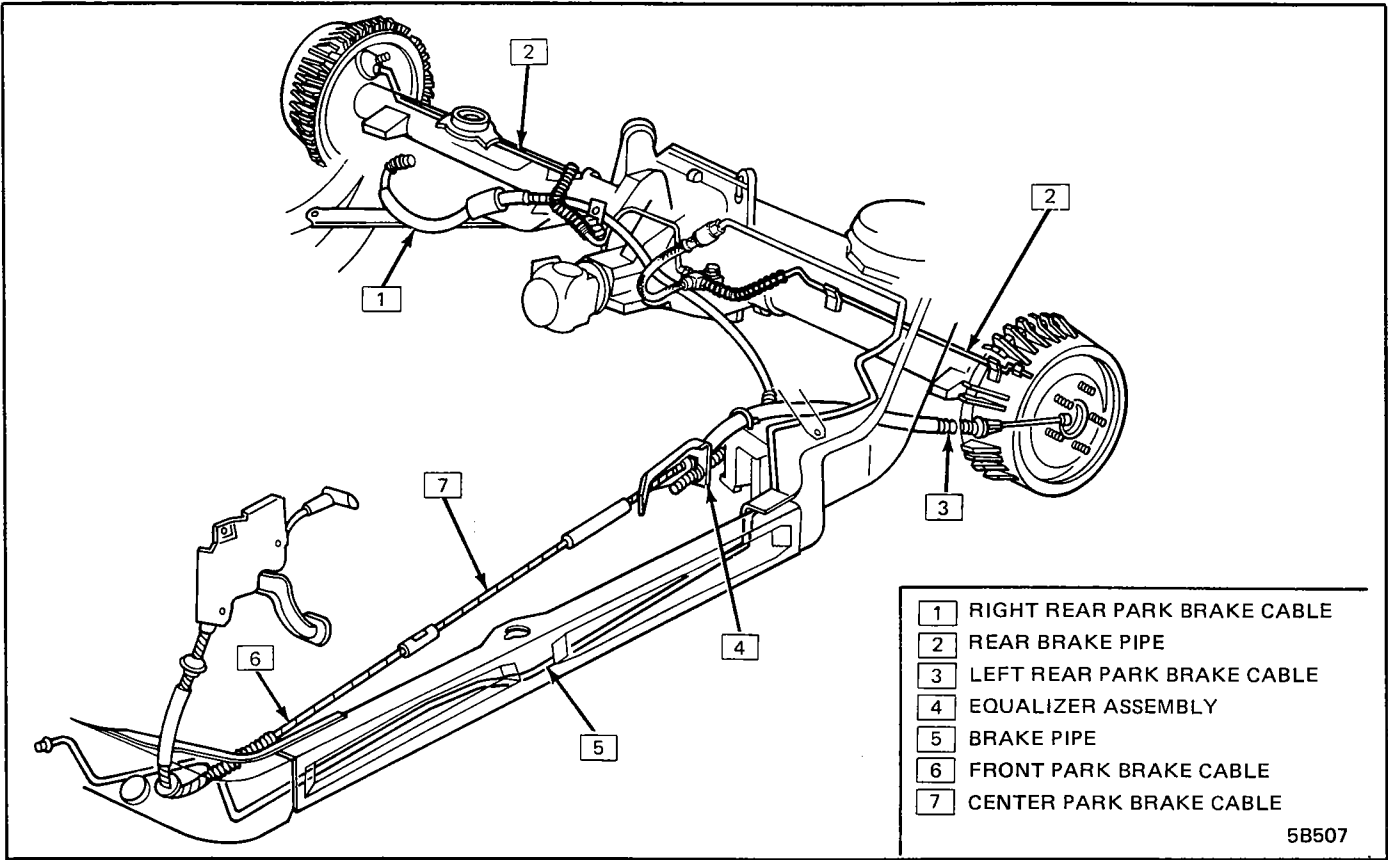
Brake Pipes and Park Brake Cables-G Carline
